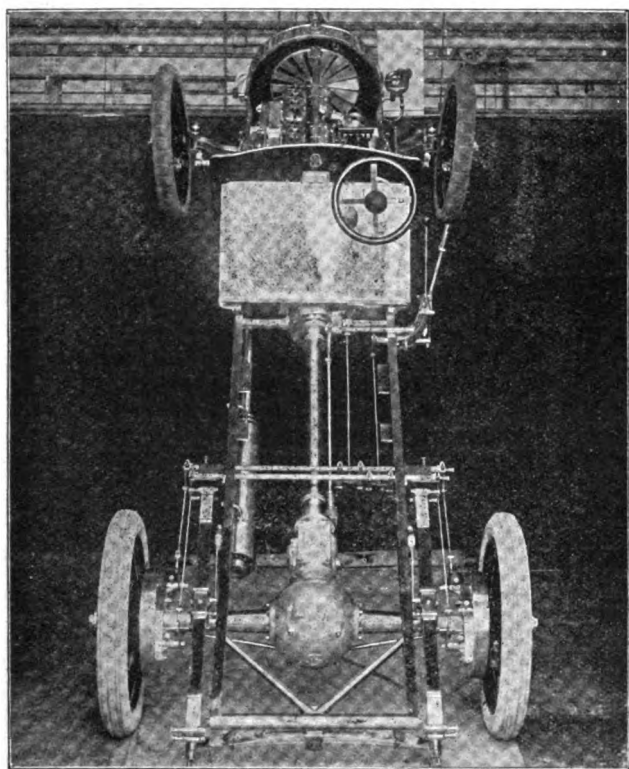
View of Chassis of Sheffield-Simplex 45-h.p. Gearbox-less Car.
